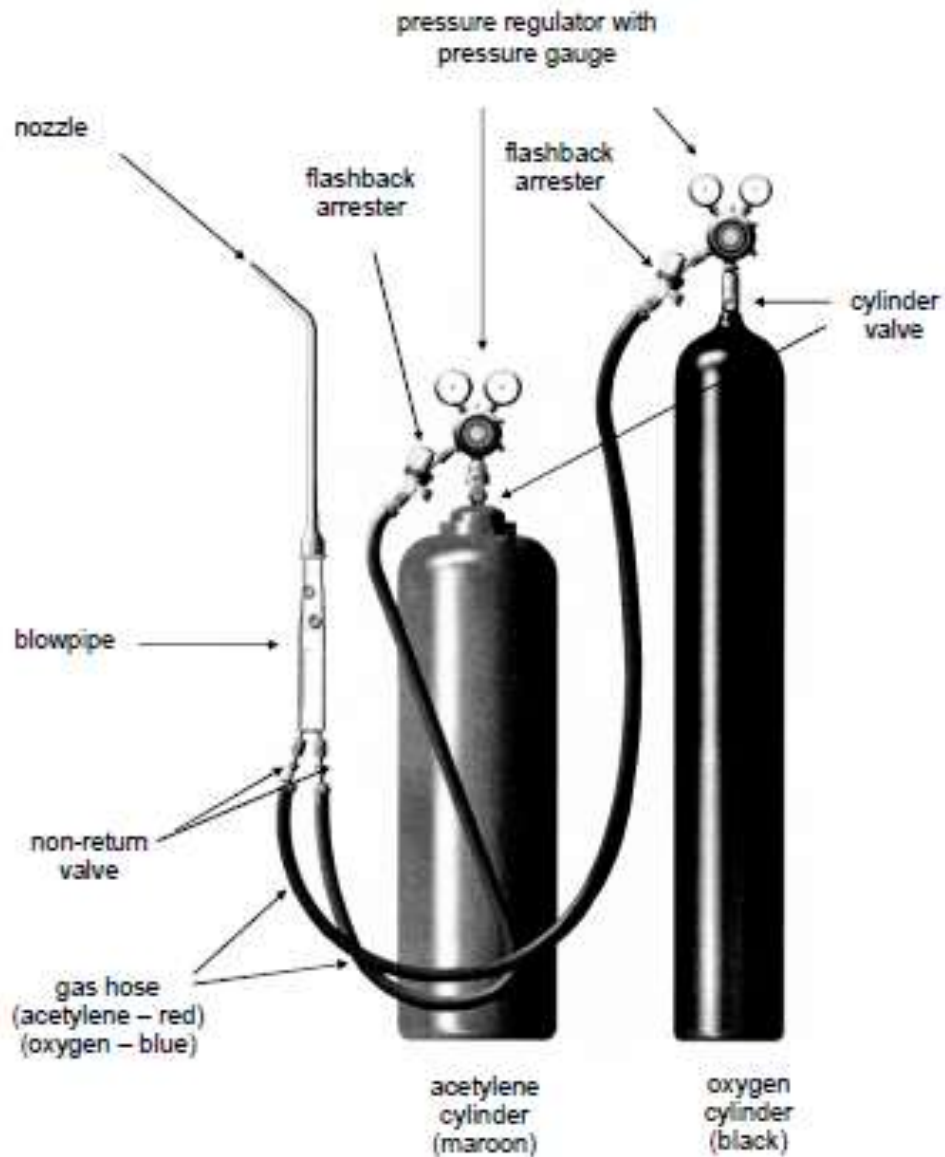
Typical equipment for welding and cutting using oxy-acetylene flame
